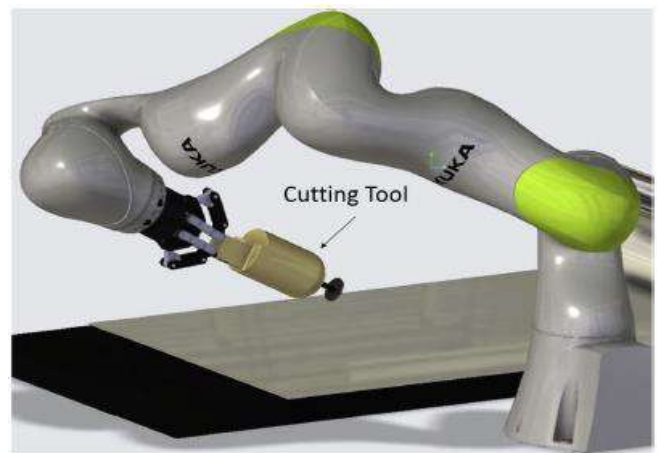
Illustration showing trimming of the components using a rotary cutting tool.
